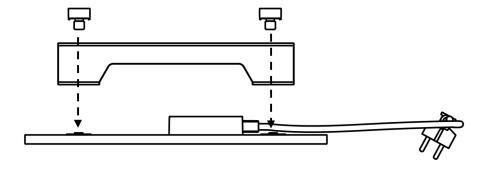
Attaching the brackets (AGH0001S, AGH0002S, AGH0003S–AGH0005S)
